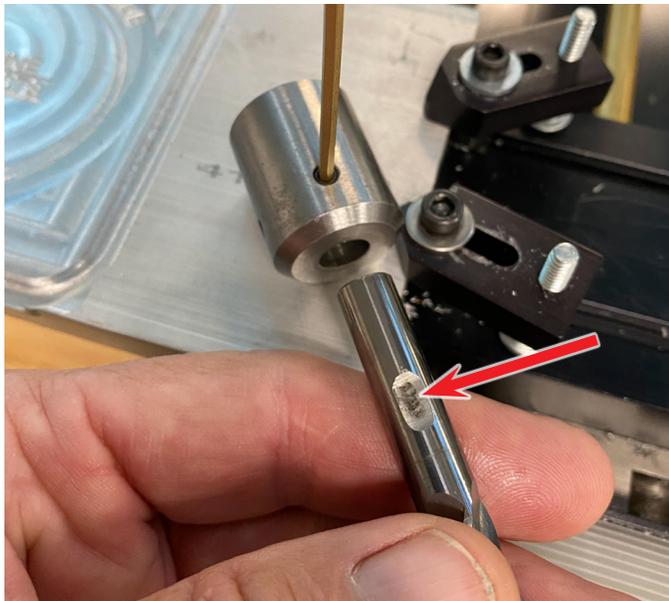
The red arrow is pointing to the ground flat on the end mill.
